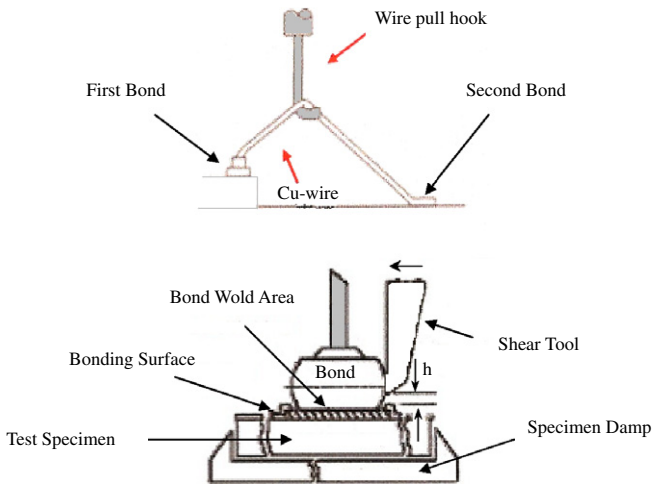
Sketch of ball shear and wire pull (a destructive testing).
